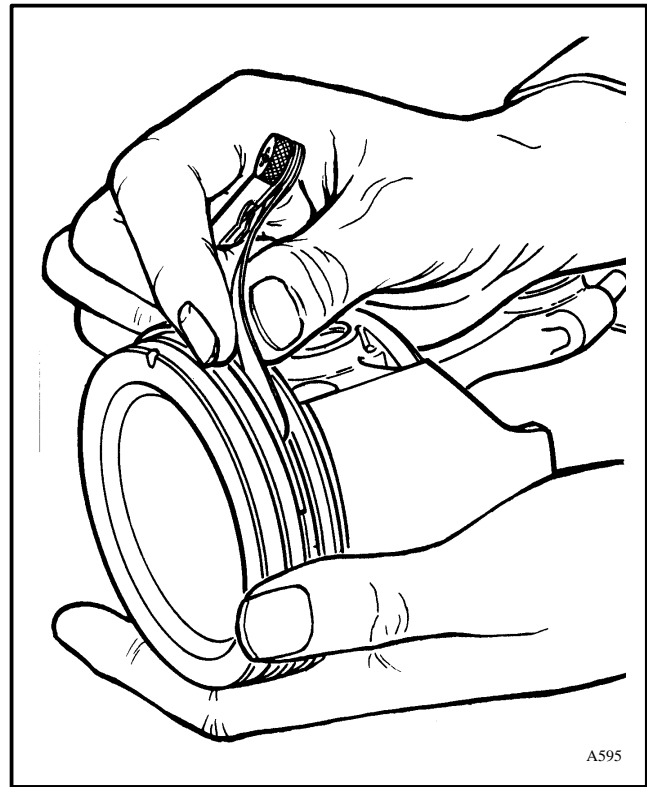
CHECK THE CLEARANCE BETWEEN THE PISTON RING AND THE GROOVE
